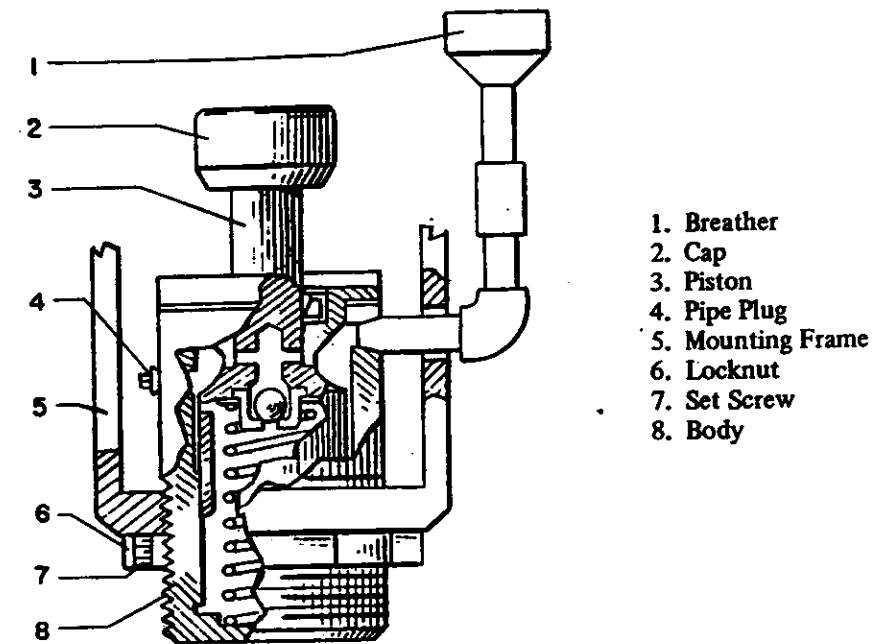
Cutaway View of Breaker Opening Dashpot Assembly
